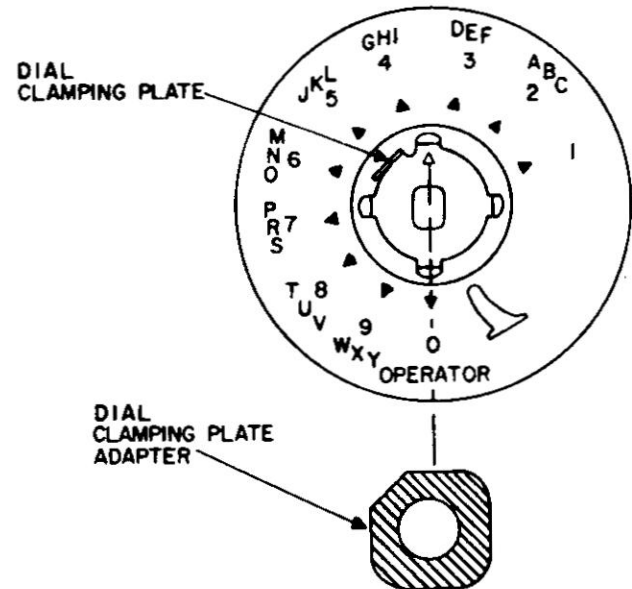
Dial Clamping Plate Adapter Location on A.E. Co. Dial Assembly.
